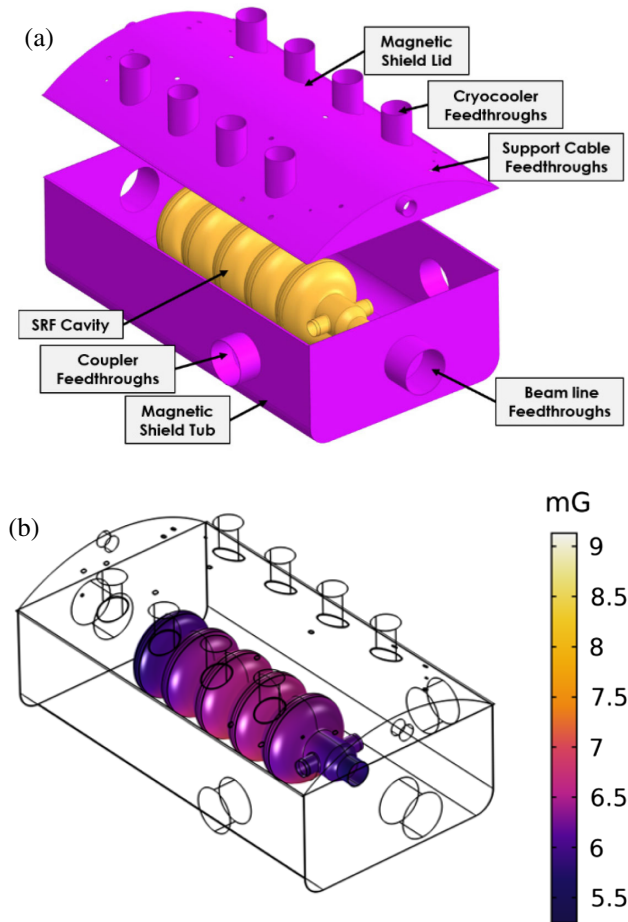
(a) The exploded view of the magnetic shield shows that it is composed of two halves, a top lid, and a bottom tub which are attached at a small interface flange during assembly. Chimneys are attached around each feedthrough to improve shielding. (b) Magnetic flux density displayed along the surface of the SRF cavity, in the case where the beam line is oriented toward North.
